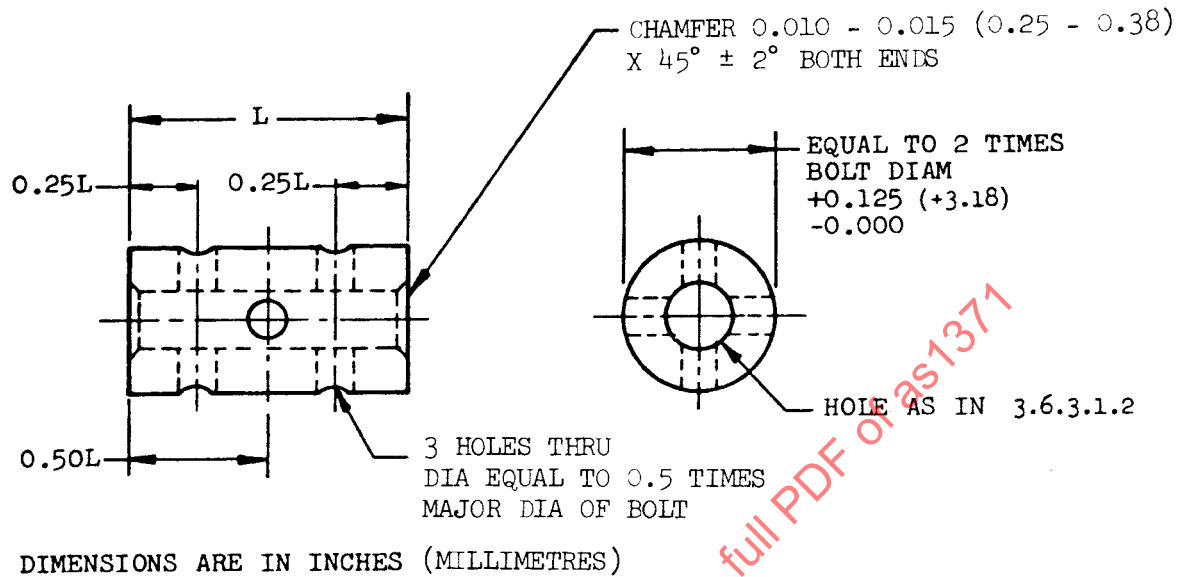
Conditioning Test Spacer - Type Fixture
